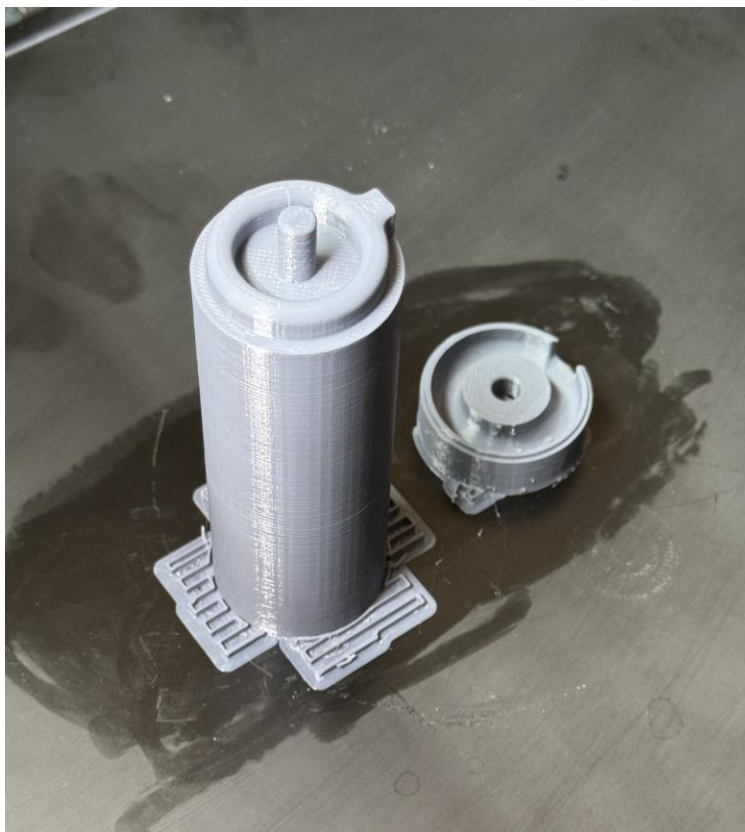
3D-printed prototype of the tamper by SUT QLAB.
